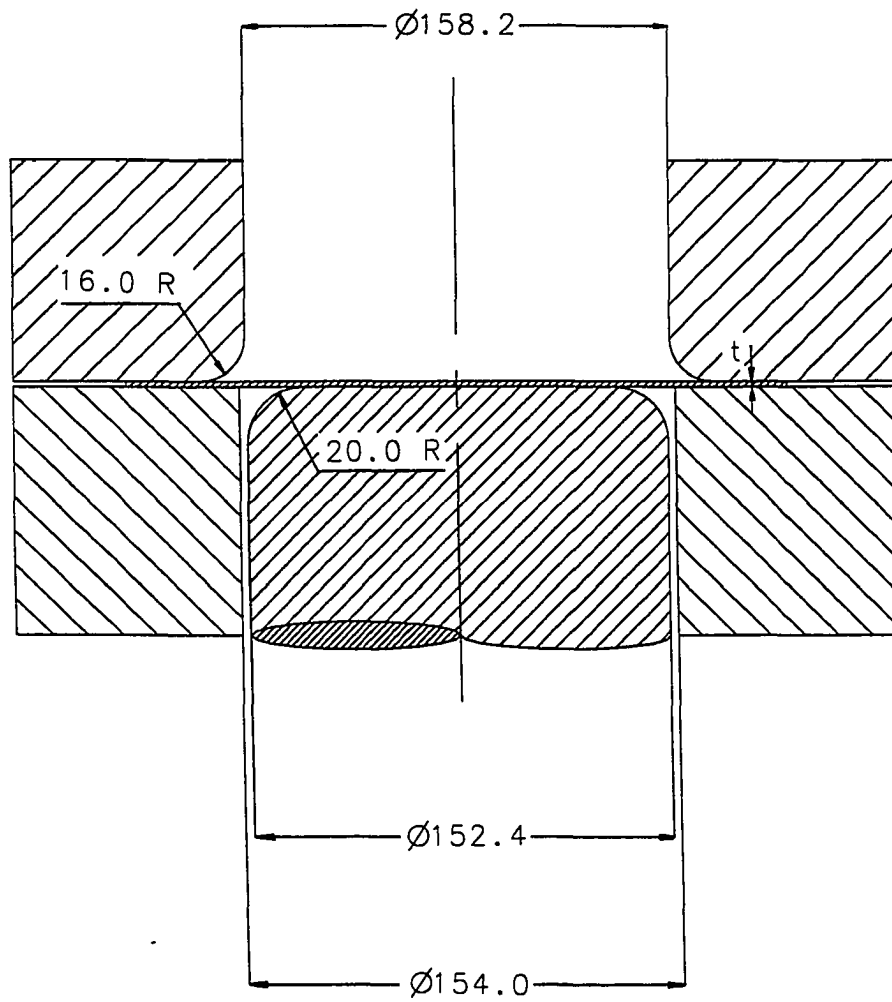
Tool geometry for deep drawing of round cups in Minster press.
